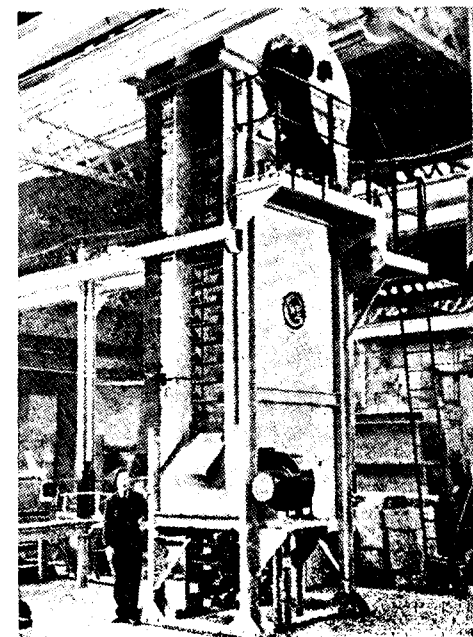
A G.W.B. Vertical conveyor Furnace, with cooling chamber wall removed to show the conveyor.
